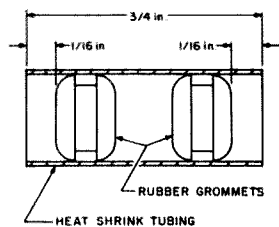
Cutaway view showing placement of grommets in heat-shrink tubing.
